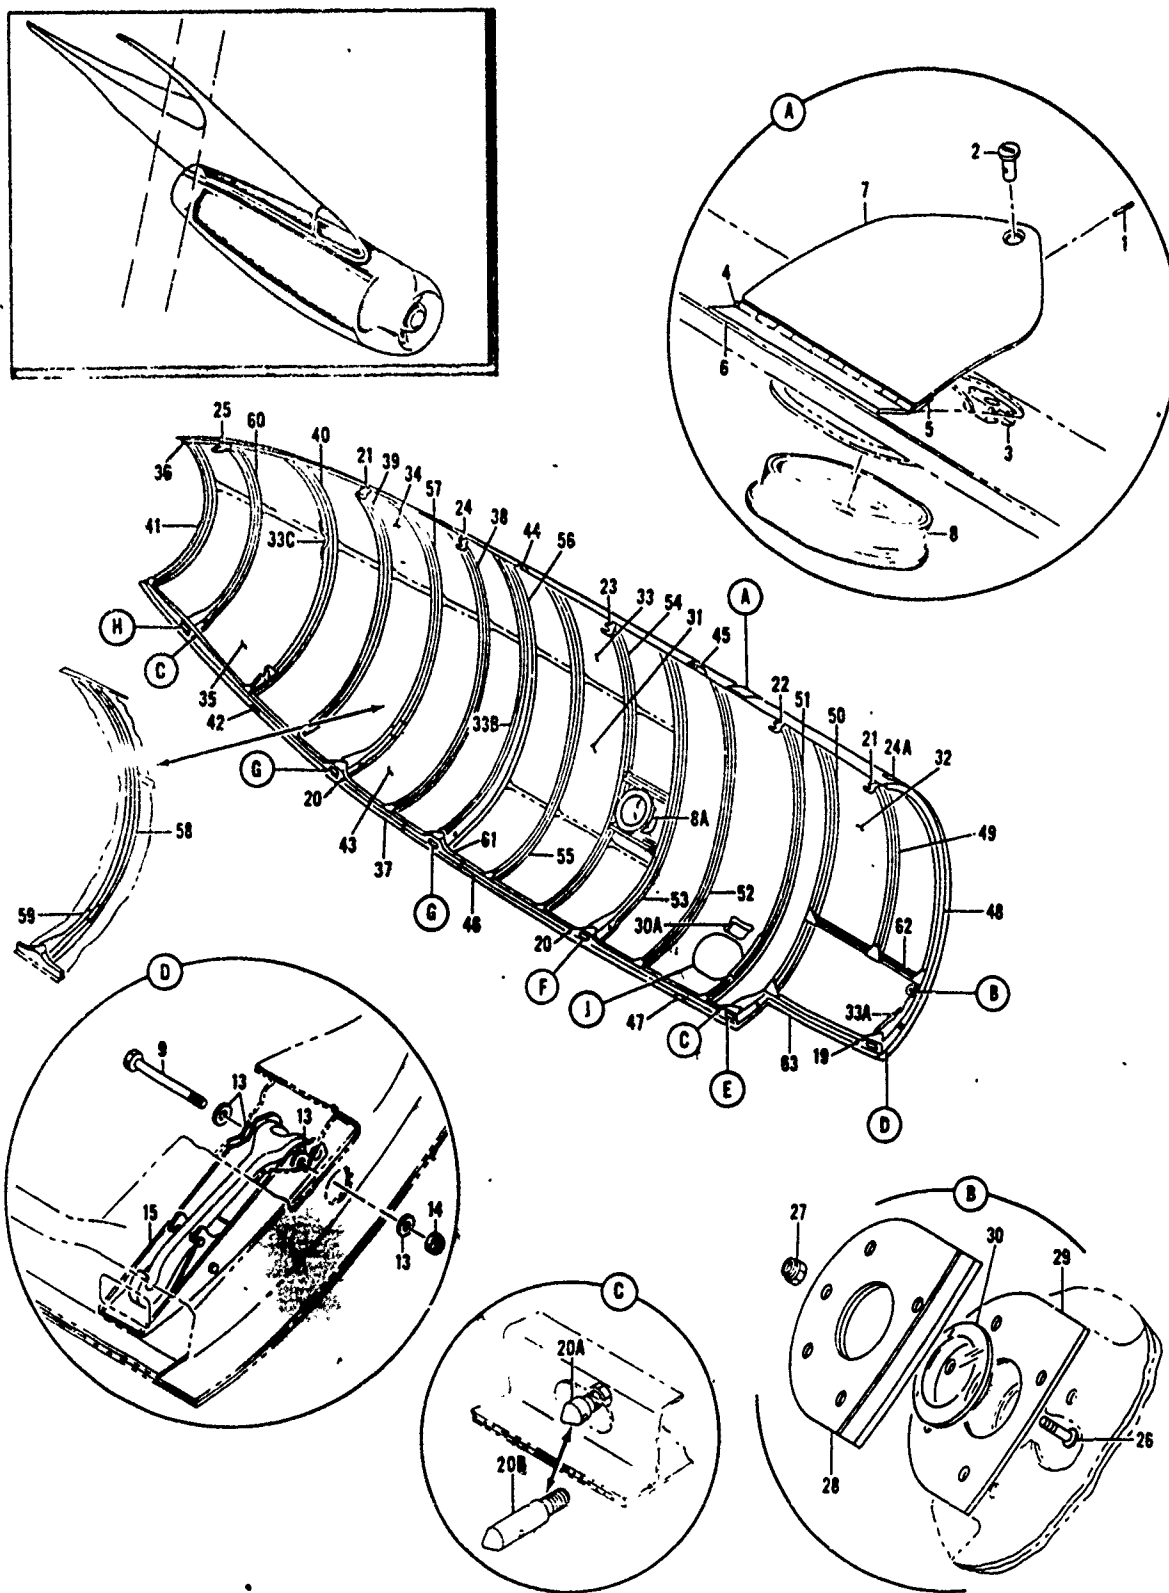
Engine Nacelle Left Hand Side Cowling Panel Assembly (Sheet 1 of 2)
